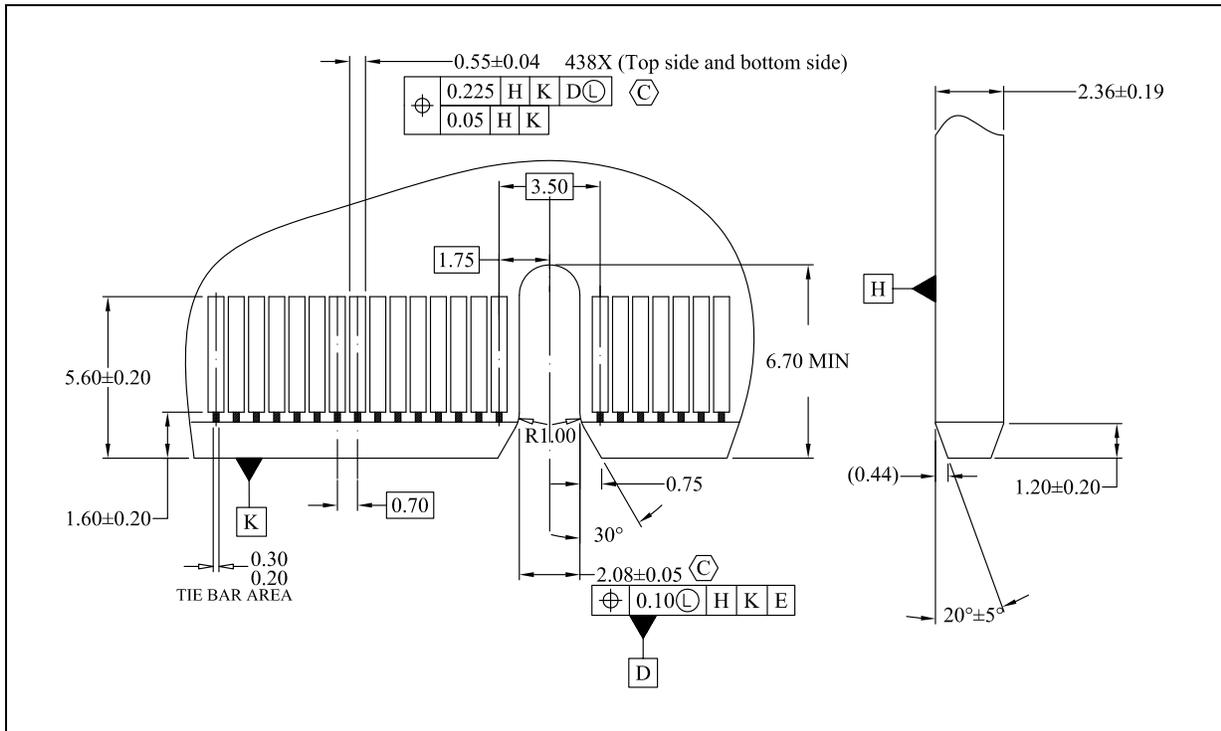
Intel SMI2 Riser Card Dimensions (Detail B)
